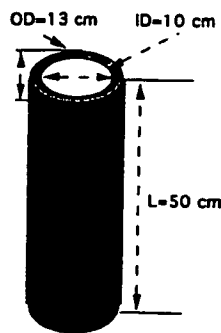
Dimensions of hollow cylinder (substrate) for DLC and TiN_x coatings on its inner surface.
